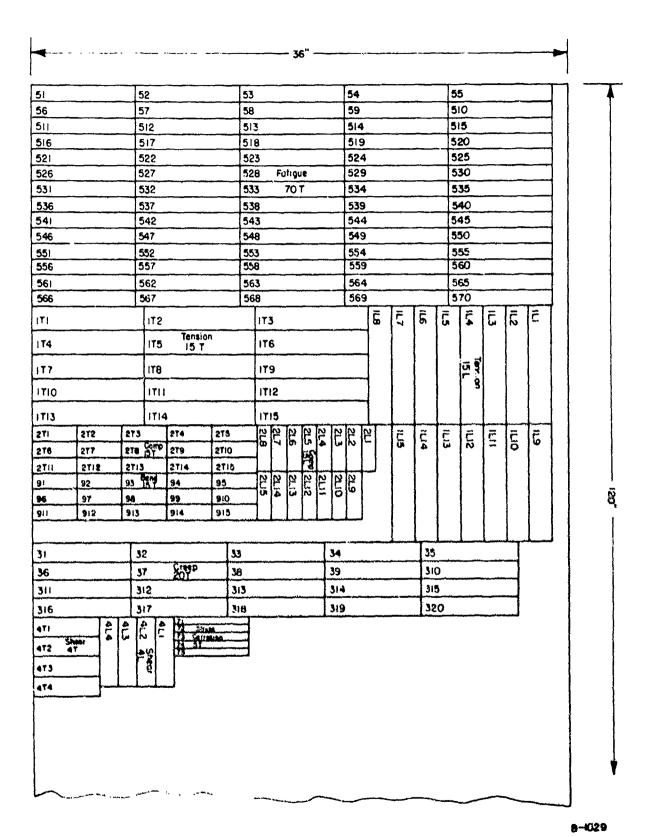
SPECIMEN LAYOUT FOR HA-188 SHEET
